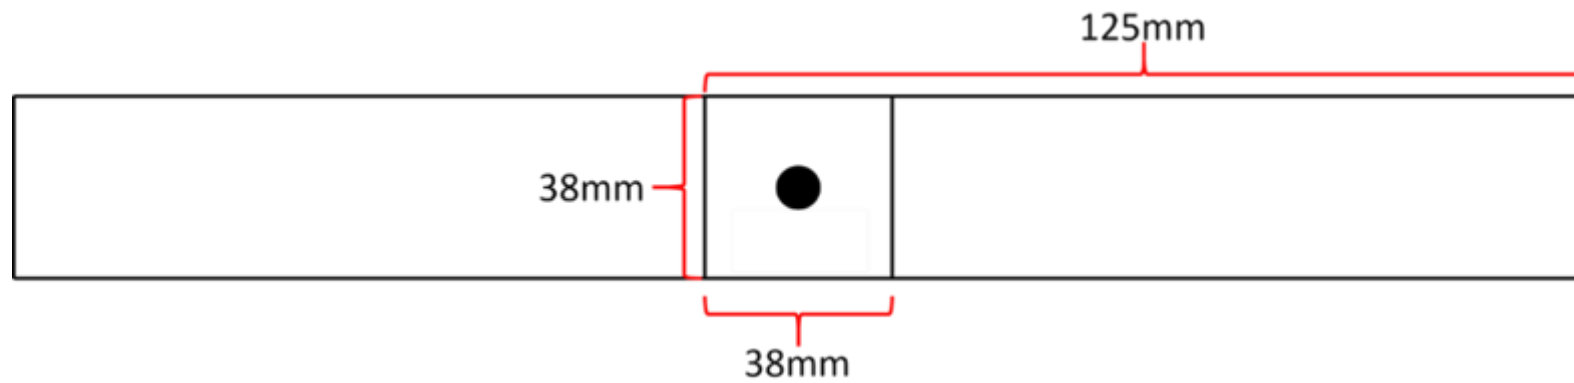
Lap shear test specimen coupons geometry (AWS D8).
